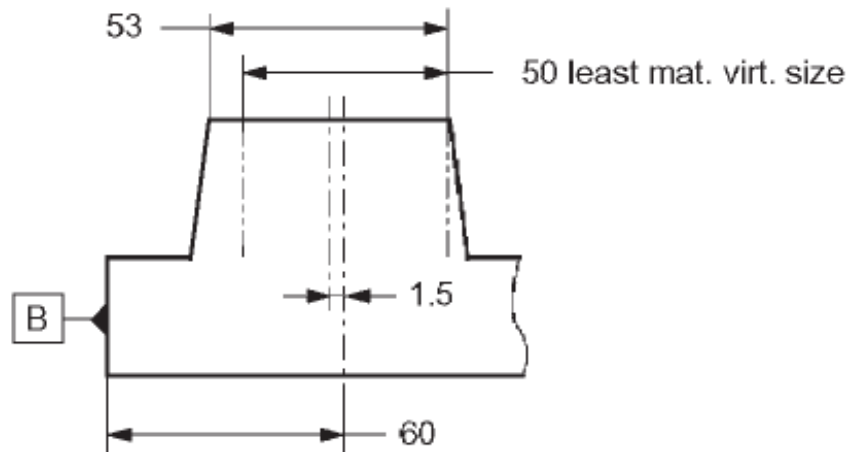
Permissible workpiece according to the tolerancing in Fig. 11.1
